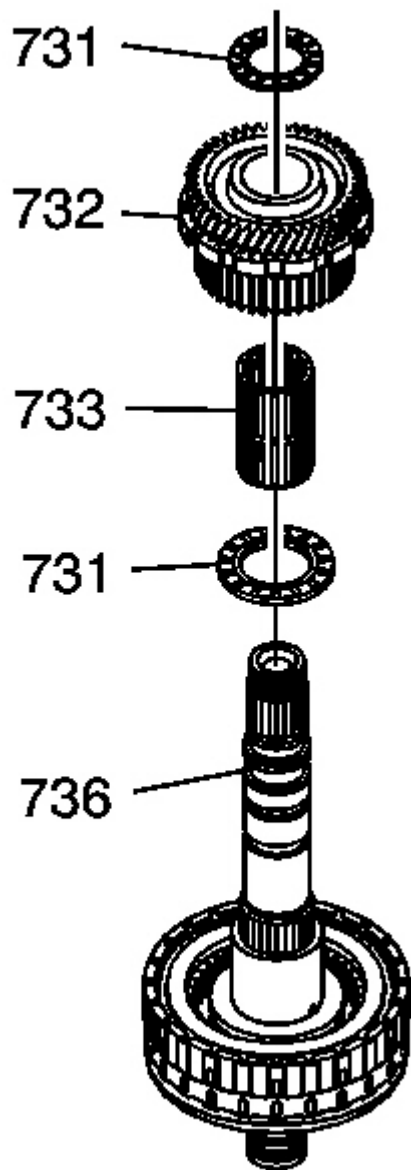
1st/2nd Clutch Shaft & Components Removed
